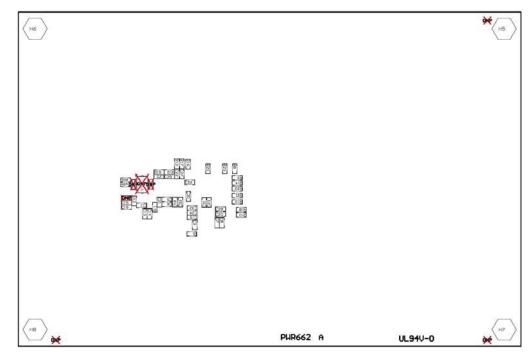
UCD3138A64OEVM-662 Bottom Assembly Drawing (Bottom view)
